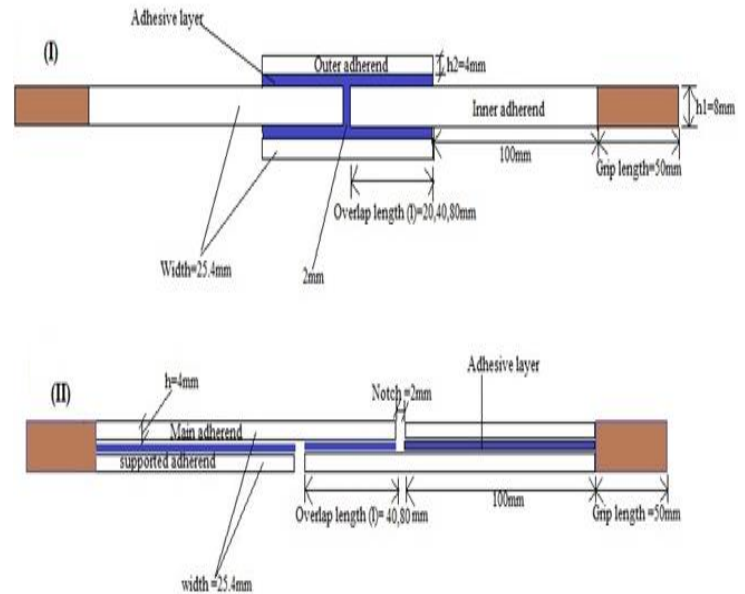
Specimen details and pictorial representation of (I) double strap GFRP joint specimen (II) supported single lap GFRP joint specimen.
